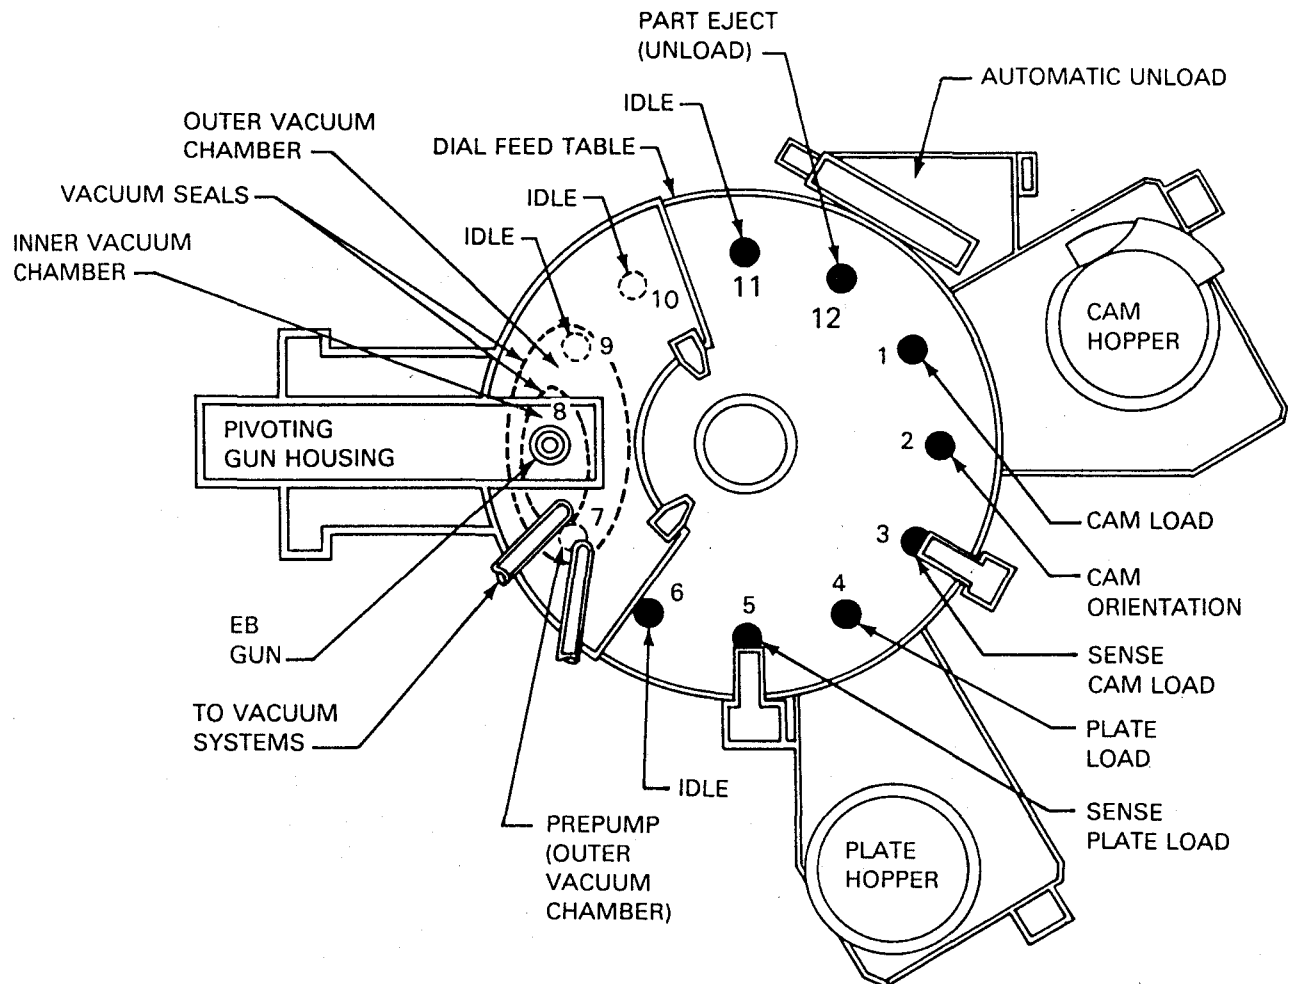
A Medium Vacuum Electron Beam Welding System with a Prepumping Zone for Continuous Part Feed Capability
